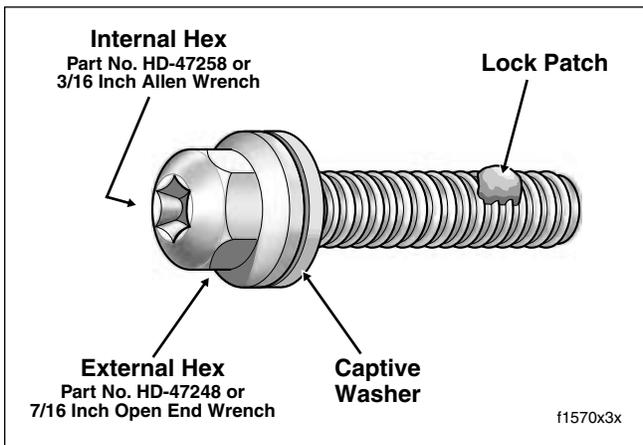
Rocker Cover Bolt (1-1/4 Inch)
